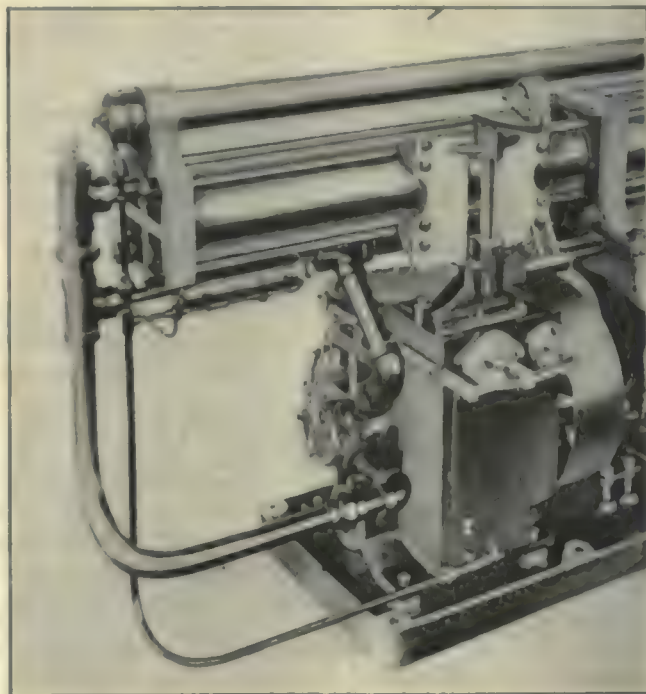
DRIVING MECHANISM OF OILGEAR BROACHING MACHINE
